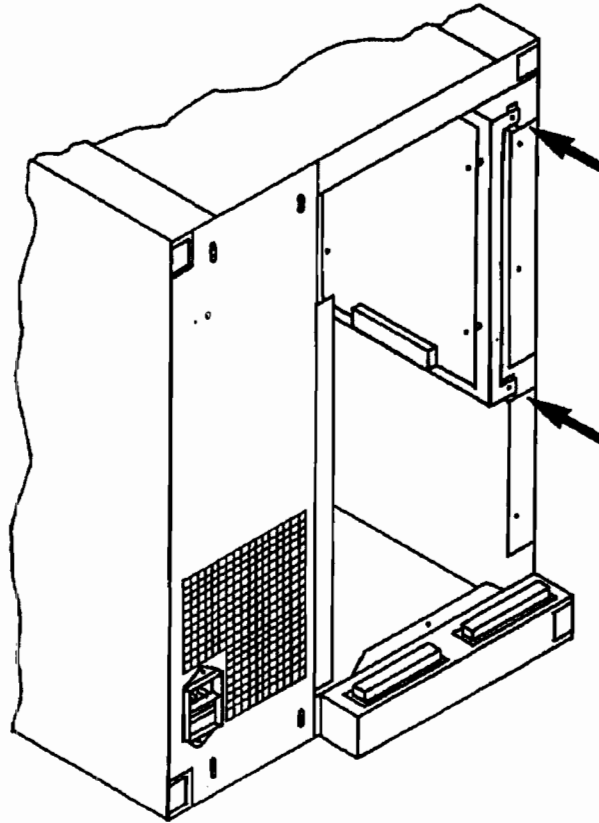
Removing the SCSI Repeater PCA Mounting Plate
